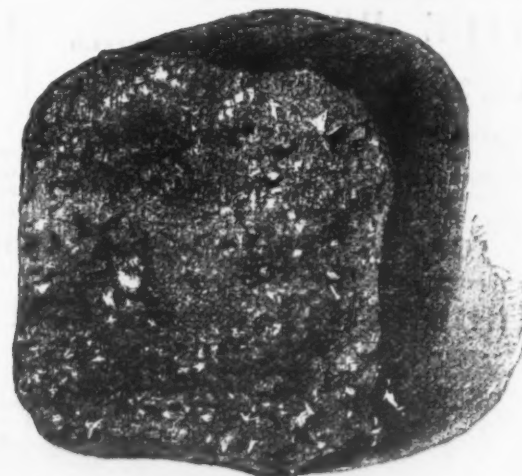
Fractured Surface of one of the Cross-Head Rods M, shown in Fig. 1.
